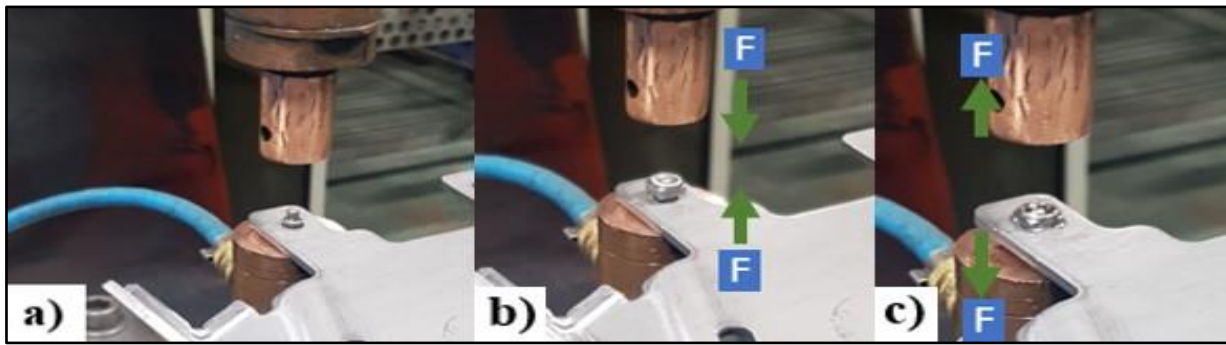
a) Aligning of sheet metal, b) application of compressing on nut and, c) completion of welding process
